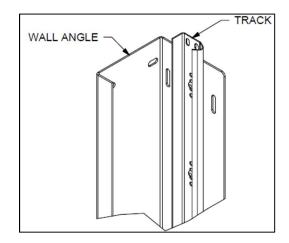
TOP OF RIGHT-HAND LOWER WALL ANGLE ASSEMBLY
